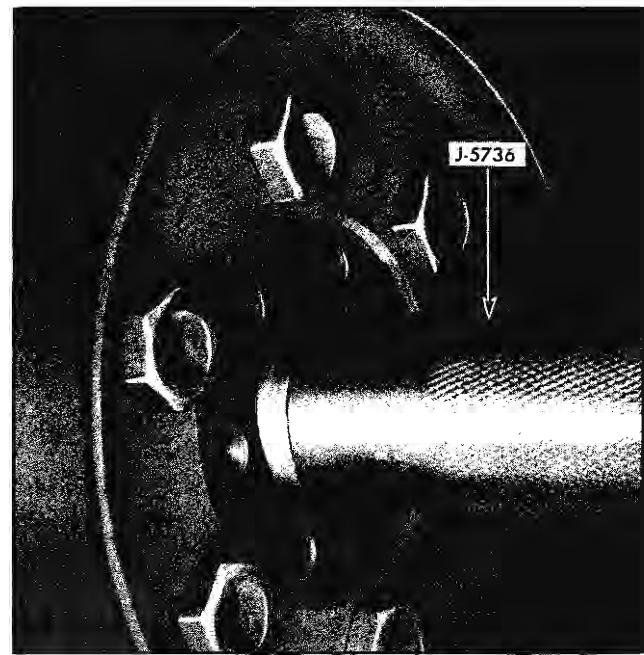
D-17 Installing Drive Shaft Pilot Bearing
